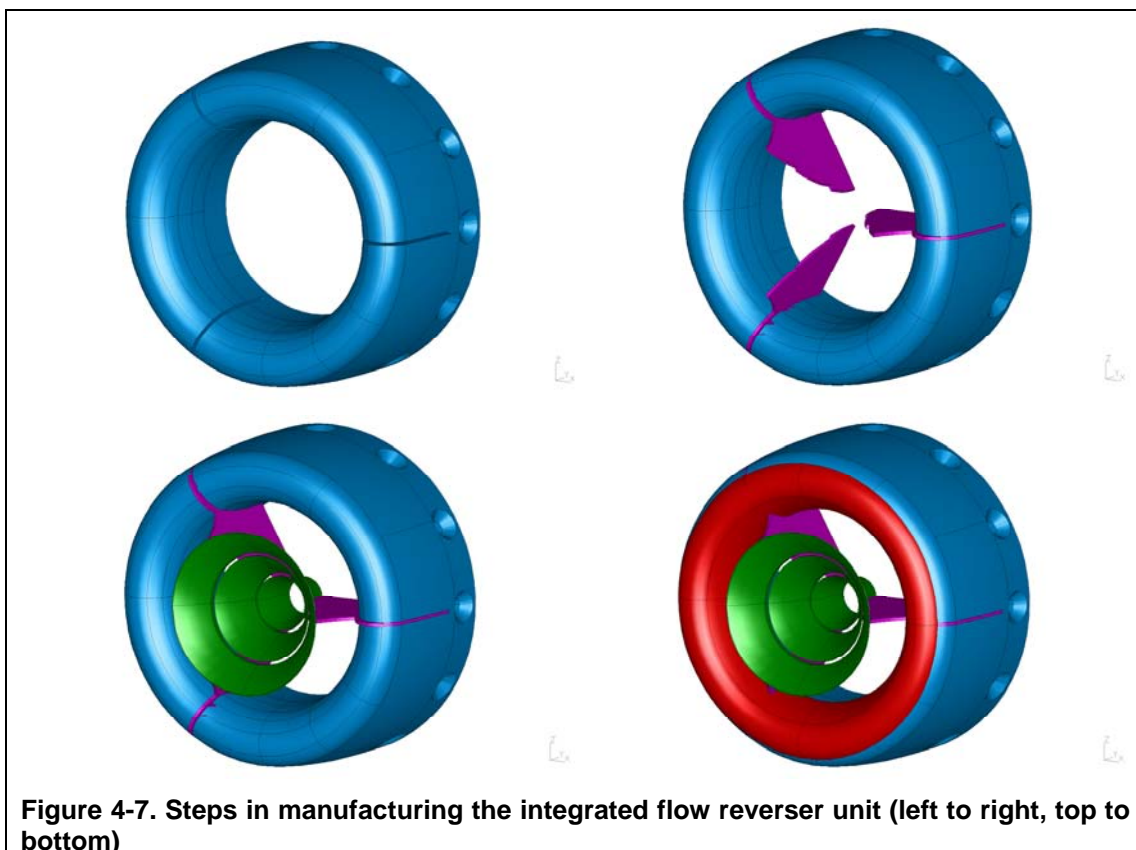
Steps in manufacturing the integrated flow reverser unit (left to right, top to bottom)
